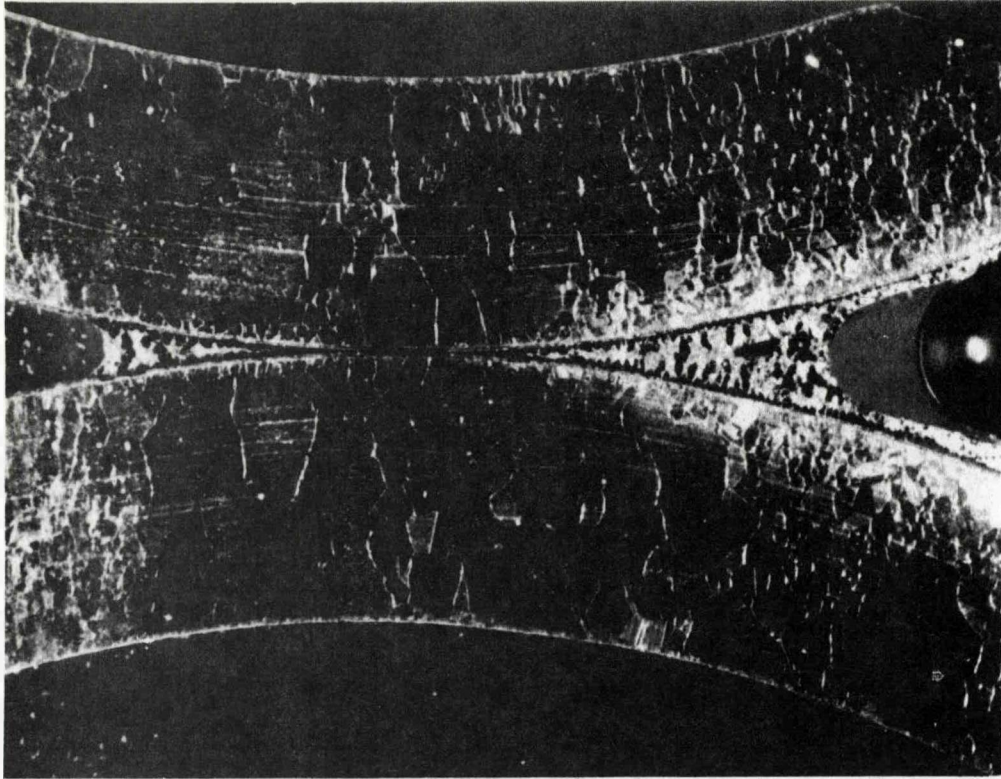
Back (Unalloyed) Side of Joint Shown in 3-2(a) Using Filler Metals NB51 (Top) and NB LM (Bottom)
